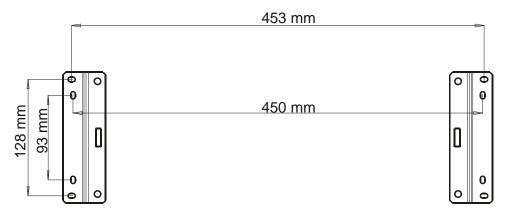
RTU Frame Metal Back Installation Dimensions
